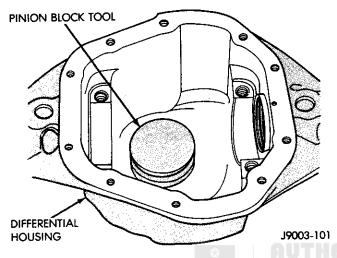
Pinion Block Tool Inserted In Shaft Bore
